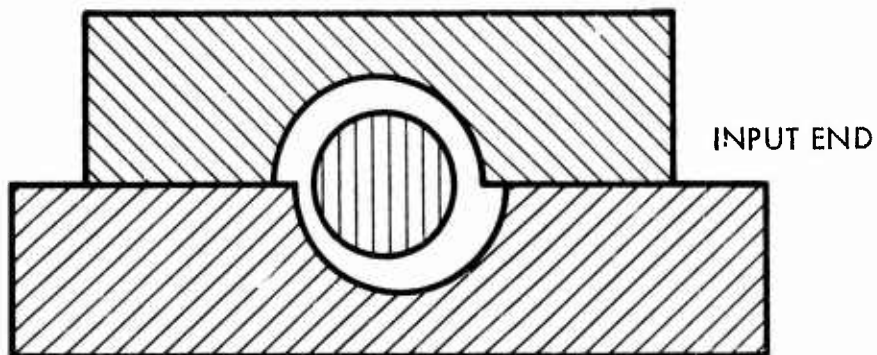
Drawing of Skew Mounting of Laser Rod 107
